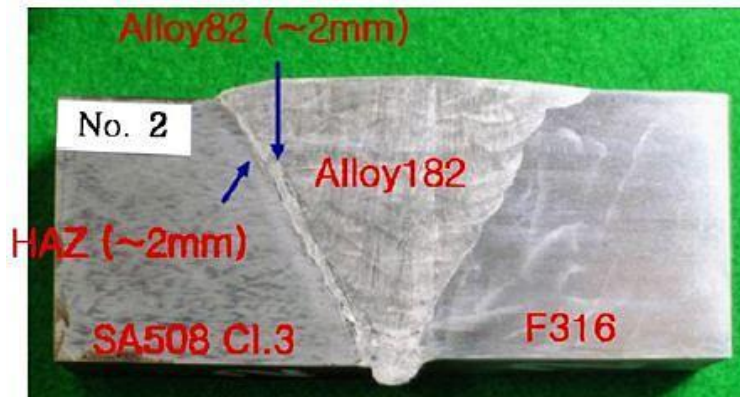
Mock-up weld representing a usual weld between the ferritic LAS (SA508-3) of a RPV nozzle and the austenitic SS (SS316) of its safe-end, using Ni-base alloys as buttering and weld metals (respectively, Inconel 82 and 182). (Jang et al. 2008)
